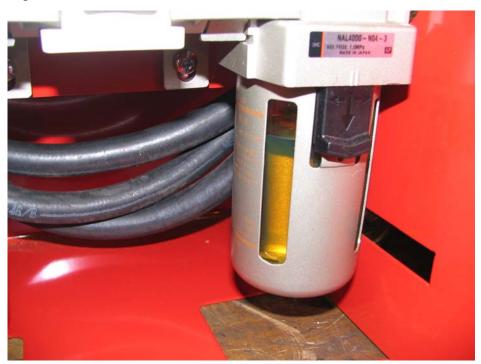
FRL Unit - Lubricator 2/3rds Full of Oil
